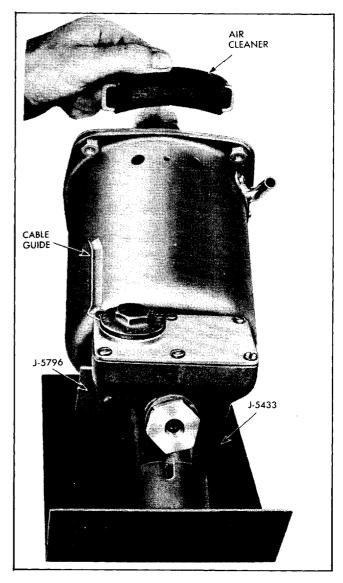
Removing or Replacing Air Cleaner Assembly
